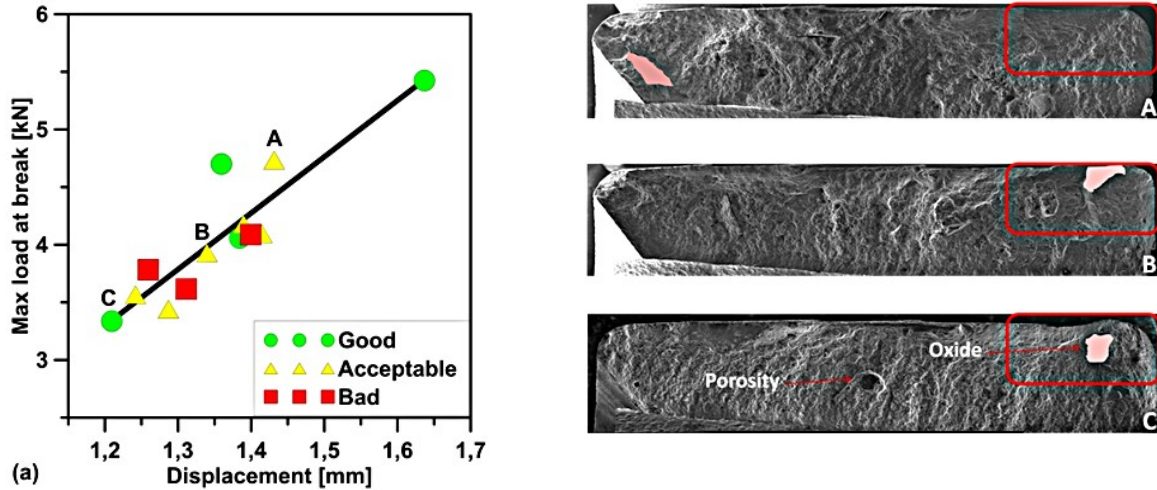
(a) Misleading casting quality prediction only based on the x-ray investigation; (b) fracture surfaces (oxide films are marked in red).
